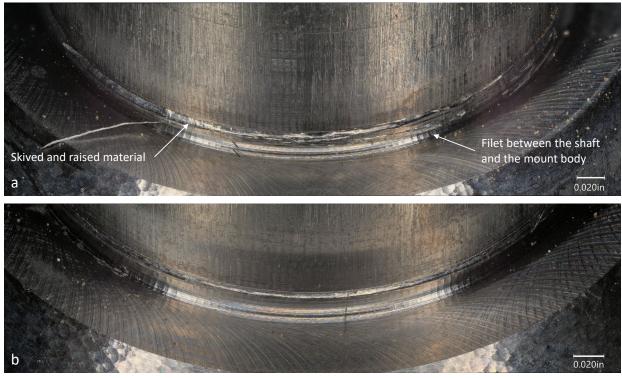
Higher magnification digital microscope images of the base of the bearing shaft where it meets the mount body for the Station 2 tilt slde anti sag roller bearing mount. Note the raised material and skived filament associated with the pressing of the bearing onto the shaft. Views a and b are 180° apart. No preexisting cracks were observed.
